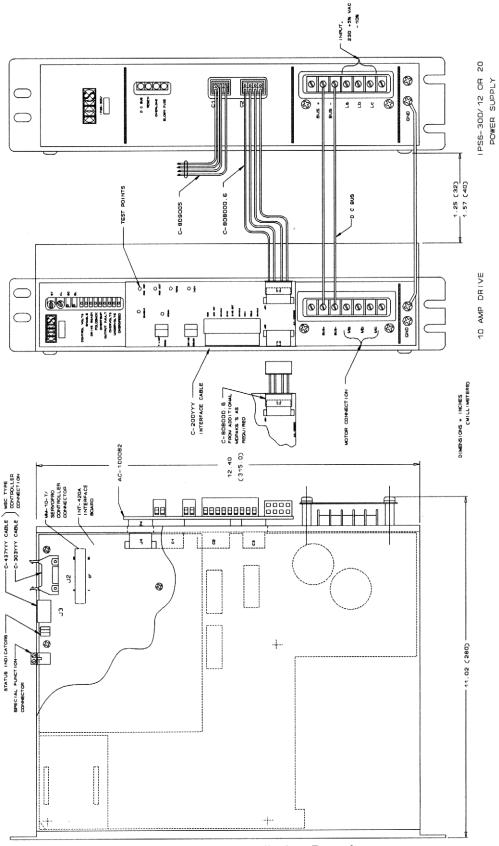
Typical Installation Drawing for 10 Amp BSD6 Drive
